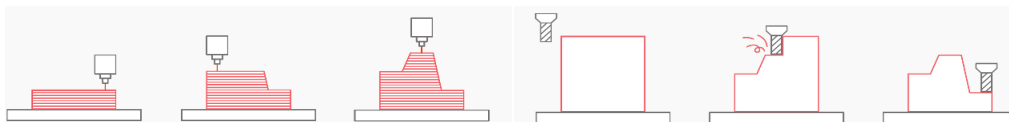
3D-printing (left) and CNC Machining (right). Wasted material from CNC Machining contributes to roughly half of the total material used to create this object
